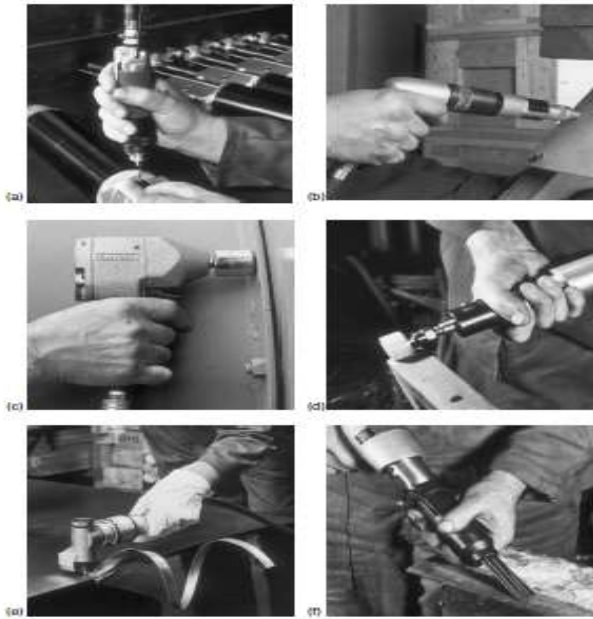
Air-operated tools: (a) hand drill (b) screwdriver (c) impact wrench (d) grinder (e) metal shears (f) hammer
